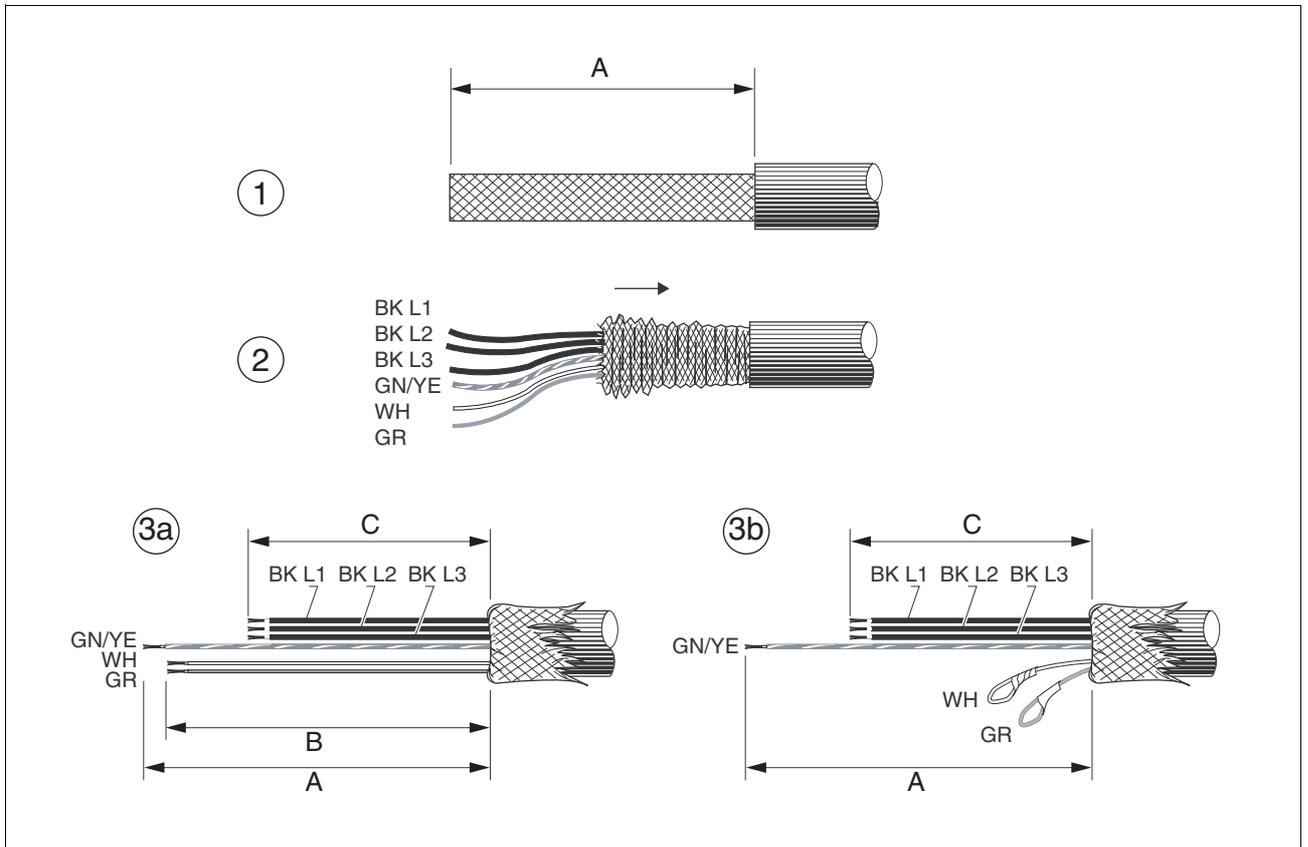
Steps (1-3) for fabrication of the motor cable
